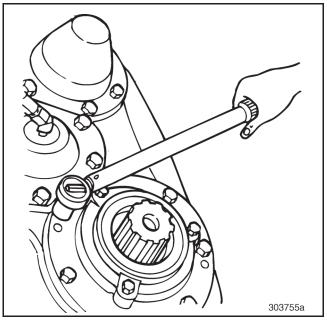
Installing Rear-Drive Shaft Assembly Capscrews
